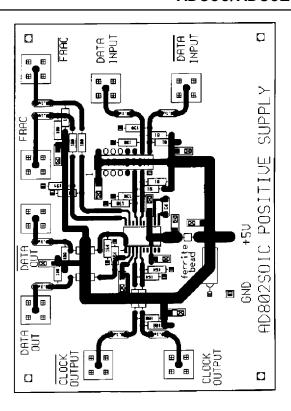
Positive Supply Configuration: Component Side (Top Layer)
